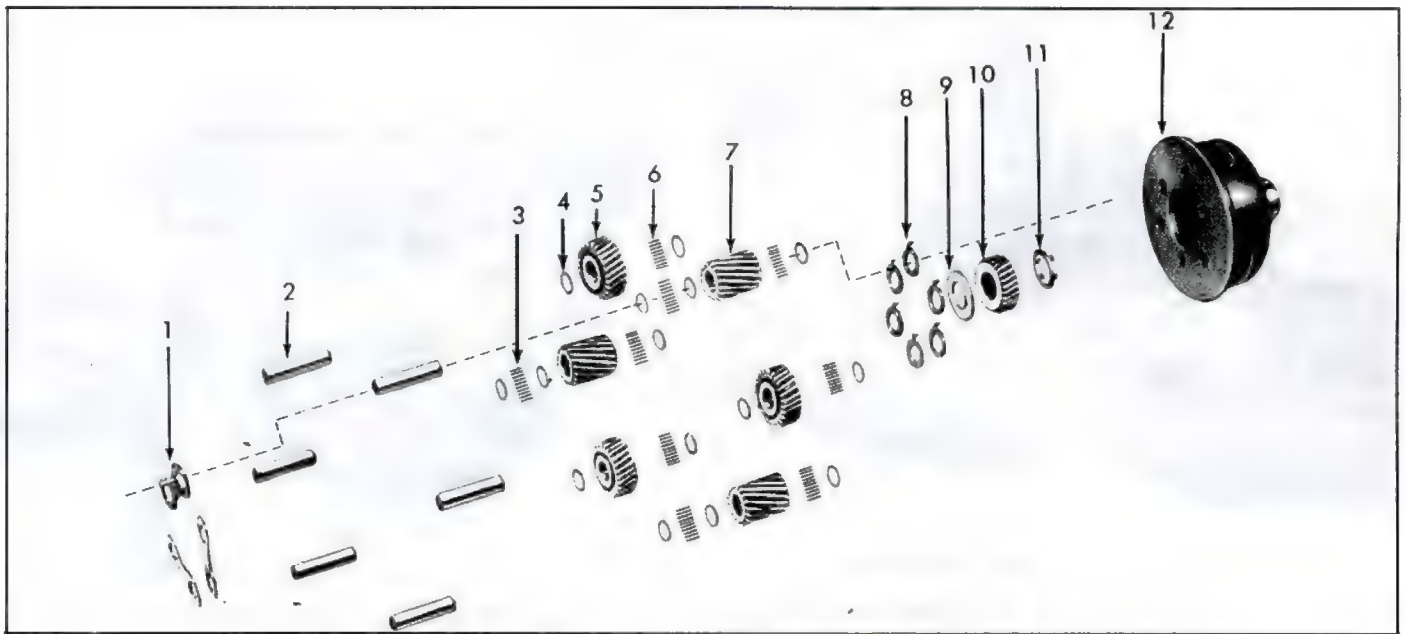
E-45—Planet Carrier Assembly—Exploded View
